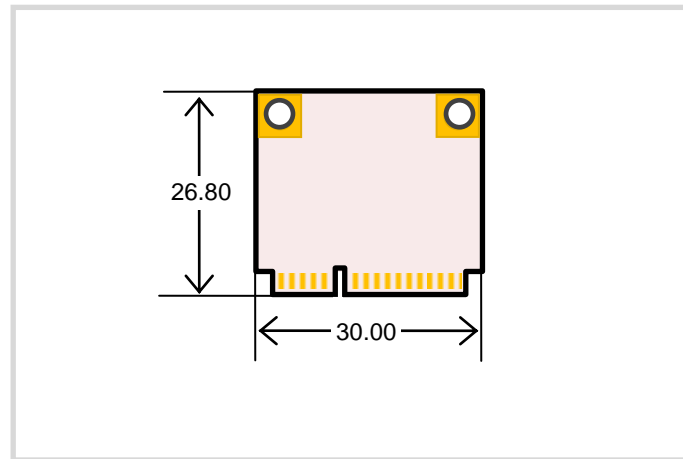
VL-MPEE-W2 Dimensions and Connectors
